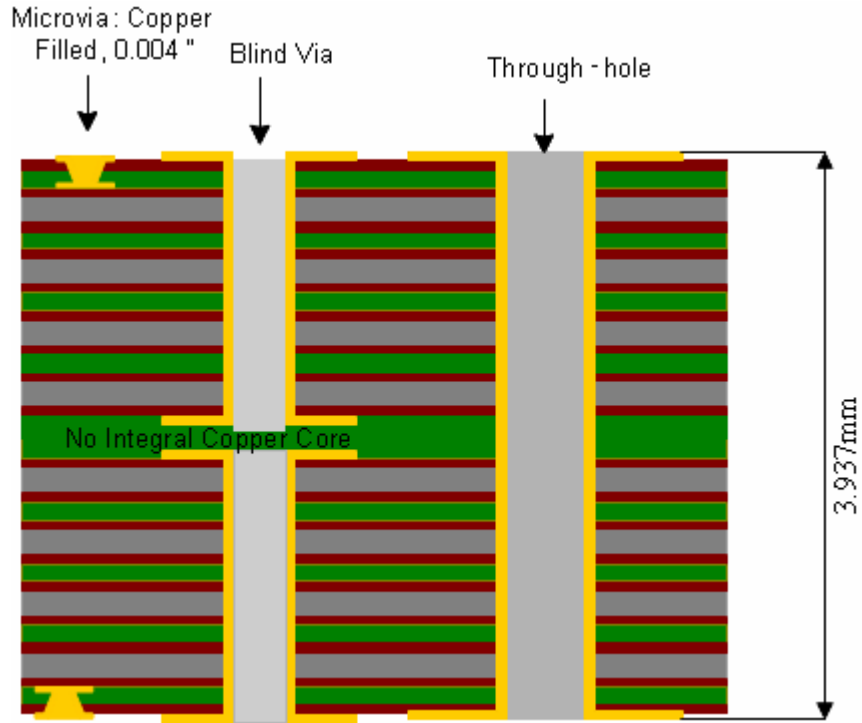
Printed Circuit Board Assembly Construction in the Test Assemblies.
